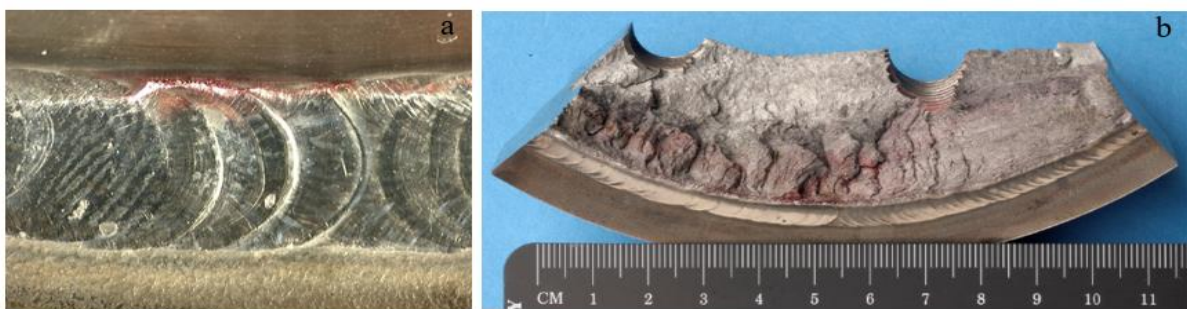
(a) Dye penetrant weld metal/HAZ crack and (b) Brittle fracture due to sigma phase (Holmes, 2015)
